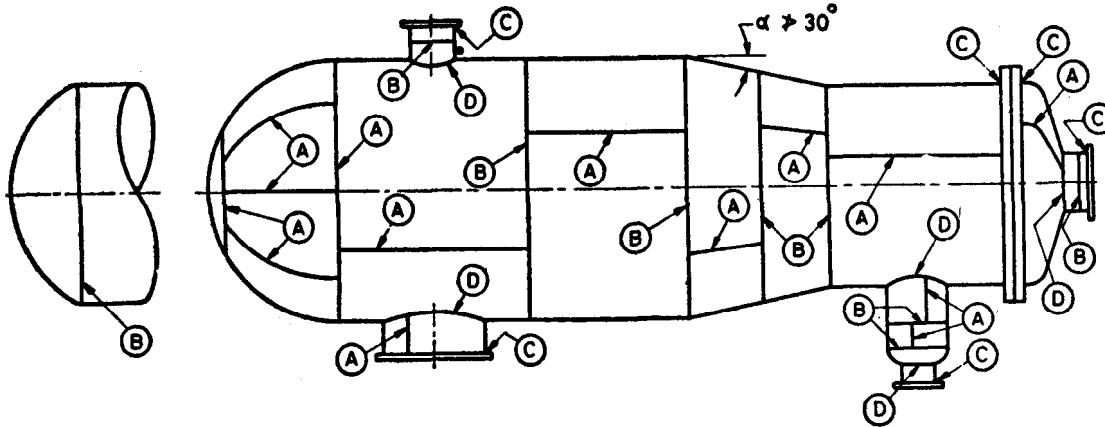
WELDED JOINT LOCATION TYPICAL OF CATEGORIES A, B, C AND D
